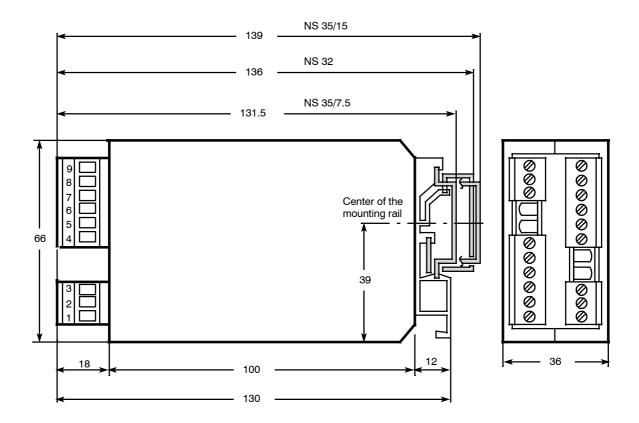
Dimensioned diagram coupling relay, dimensions in mm
